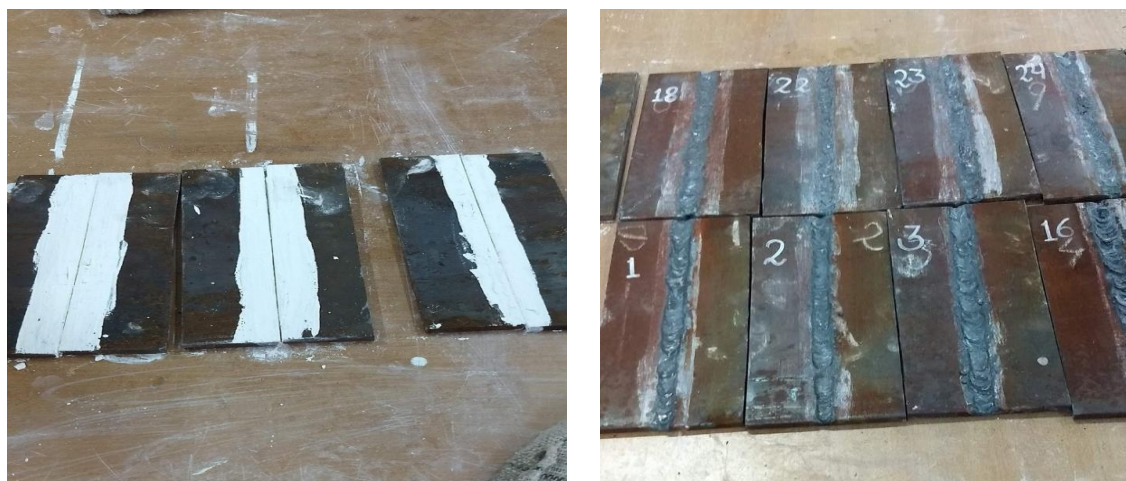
(A) Sample with flux coating on the square butt joint (B) Welded samples
